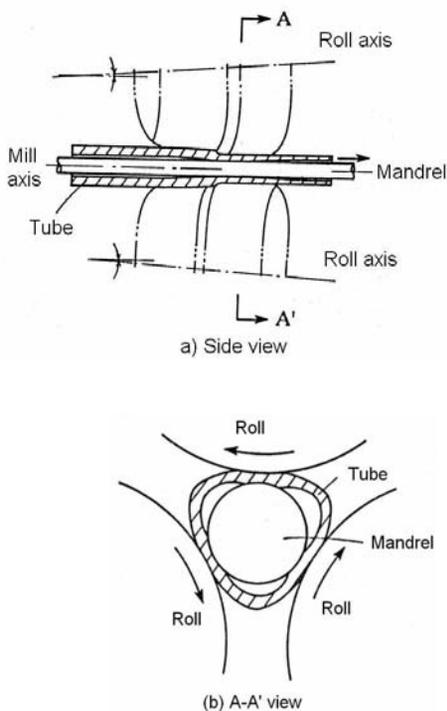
Schematic view of rotary rolling in elongating process of manufacturing a seamless tube [2]
